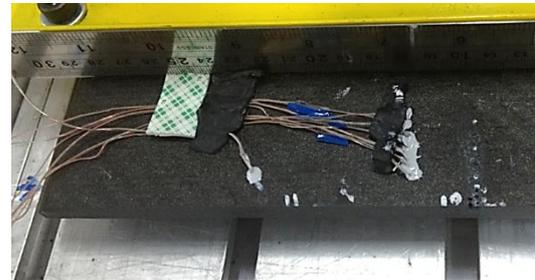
Set of thermocouples installed perpendicular to the machined edge
